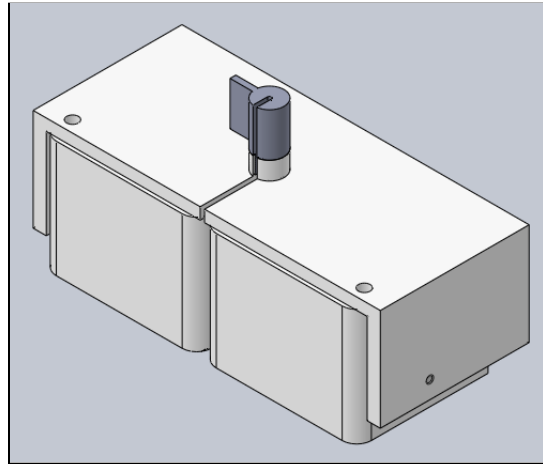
A modeled assembly of the final design is depicted in SolidWorks.
